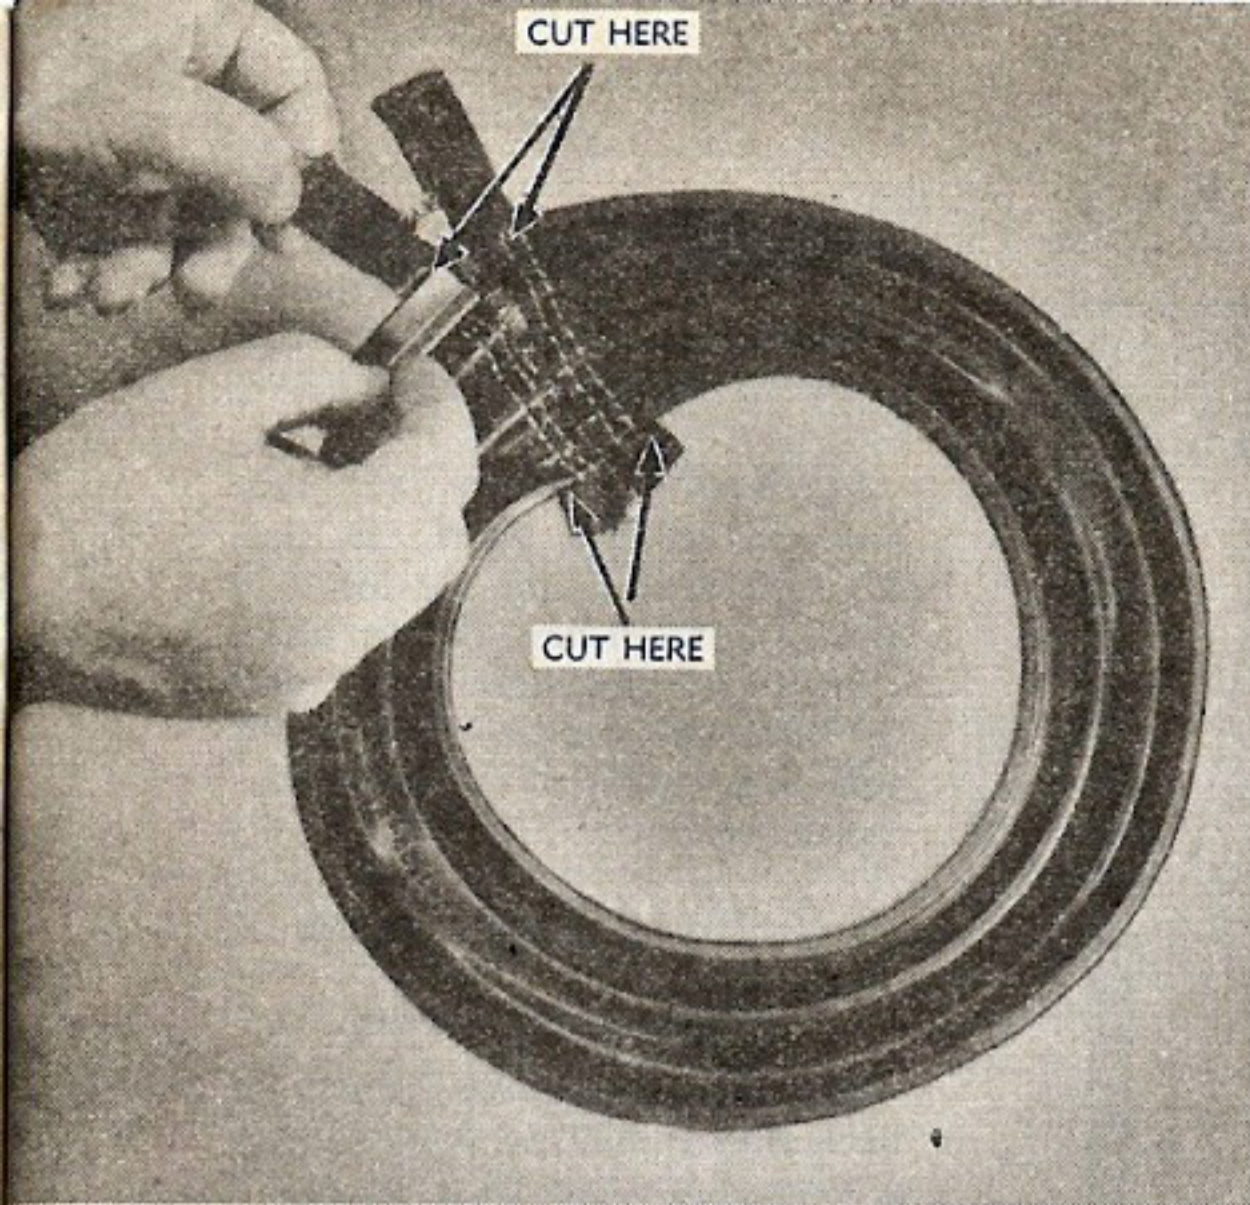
This is the back side of the steering-knuckle boot with your razor blade already to cut in between the boot and the zipper.
